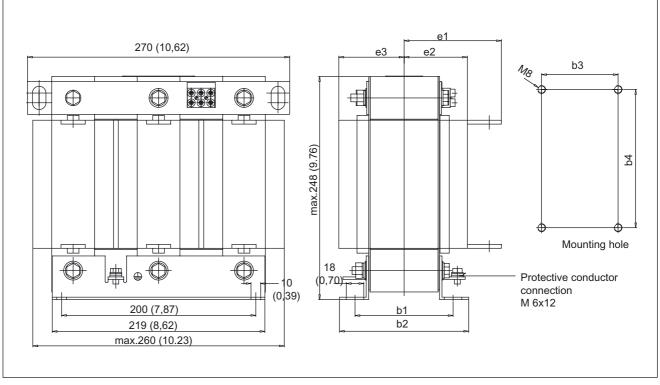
Dimension drawing: Motor reactor, frame size FSE
